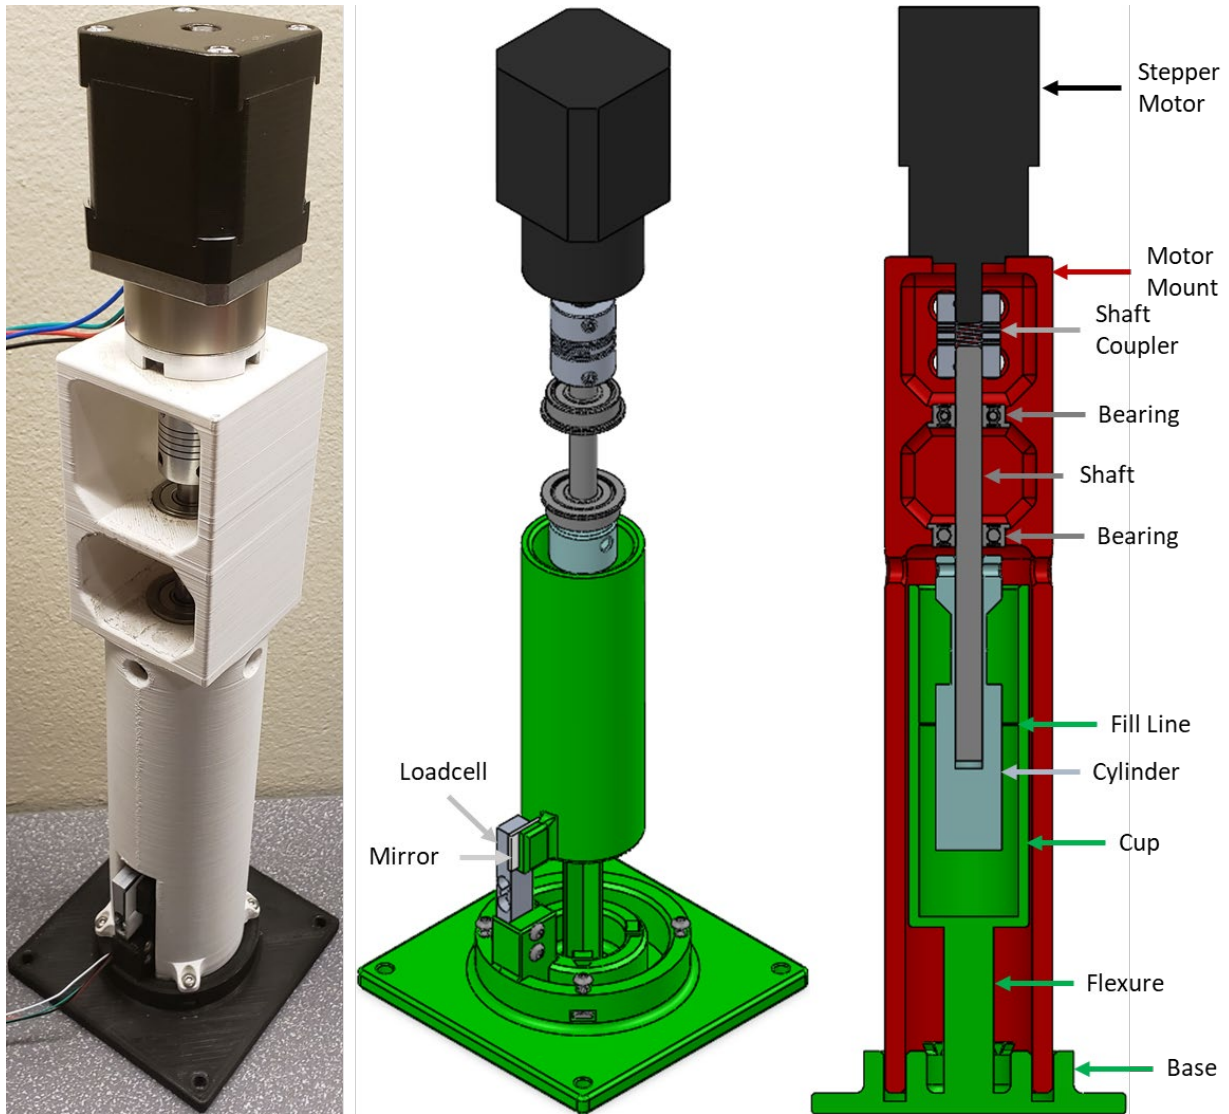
CAD of the version 2 test assembly and a 3D printed prototype. In the CAD, the motor mount is red and the cup-flexure-base component is green. The other components are approximately their actual color. The assembly is approximately 13.1" tall with the motor and 10.2" tall without the motor. The base is a 3.7" square.
